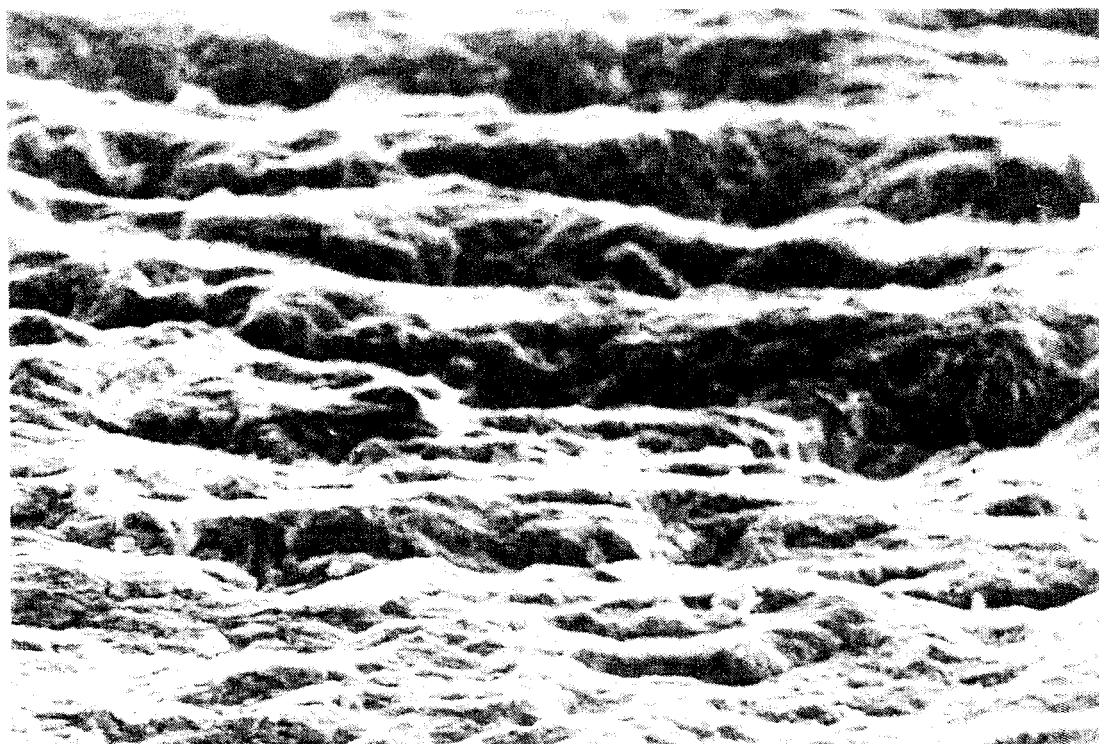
FATIGUE CRACK STRIATIONS ON A GEAR TOOTH FAILURE (X500)
